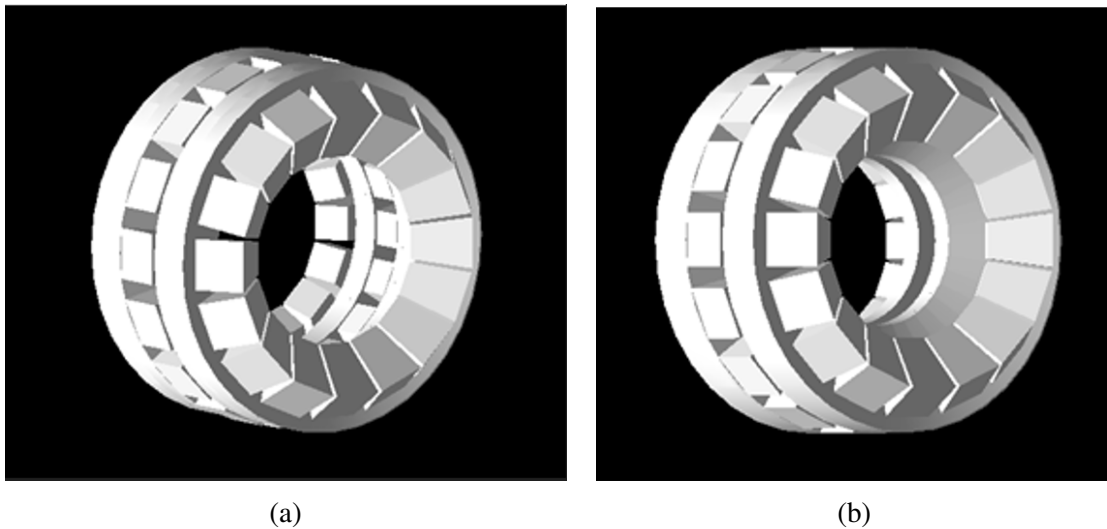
Array with shielding between the rings. The left shows shielding with an inner radius of 4 cm, and the right shows inner radius of 6 cm.
